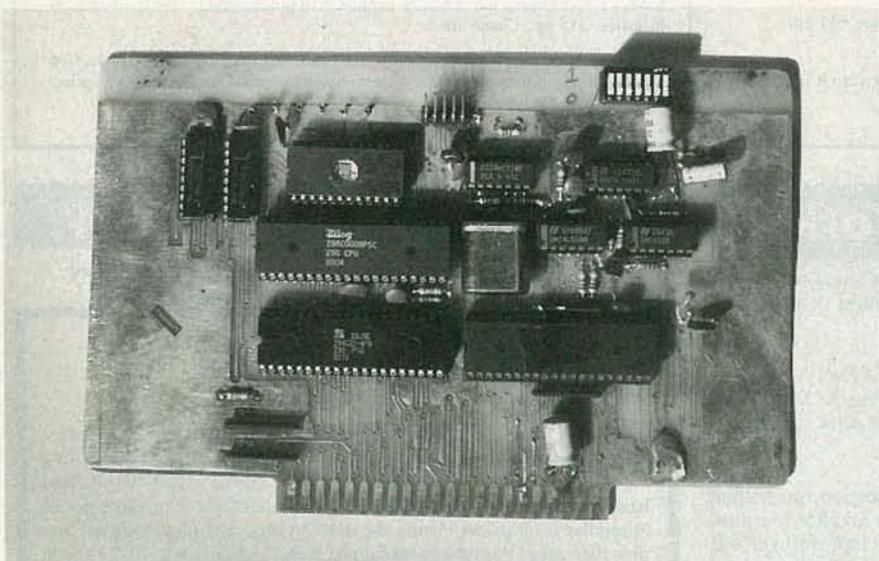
FULLY ASSEMBLED CPU BOARD.
